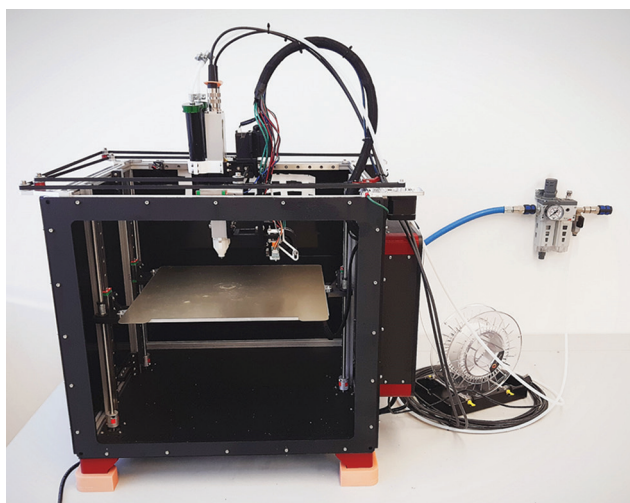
The modified Railcore II 300 ZL printer, extended with a Viscotec Vipro-HEAD 3/3 extruder.
